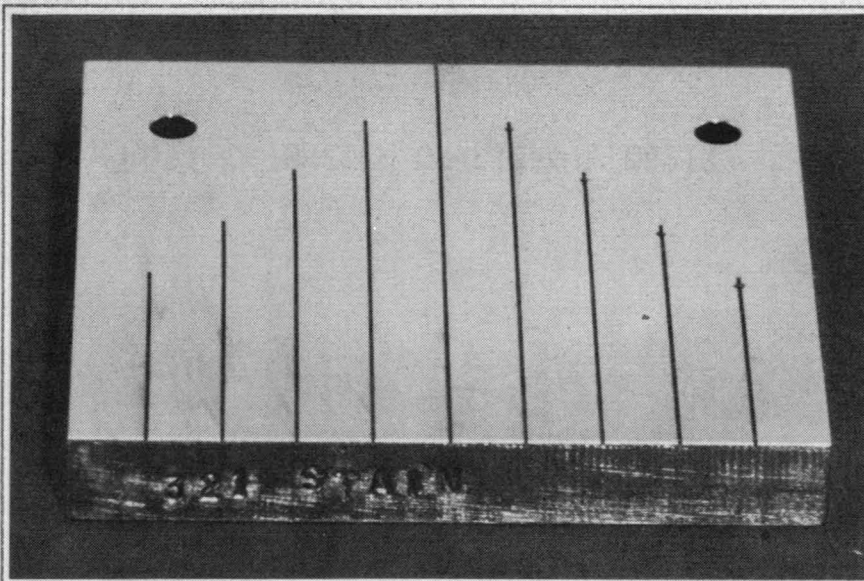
Layout of spark-eroded channels and holes drilled in DEI A series plates
